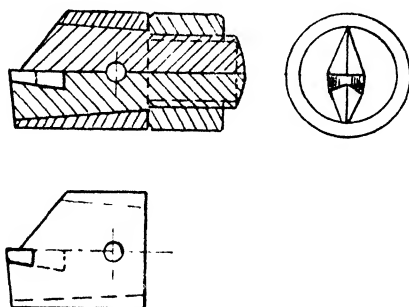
Patented method of setting the diamond (Fig. 168) in a tool holder
